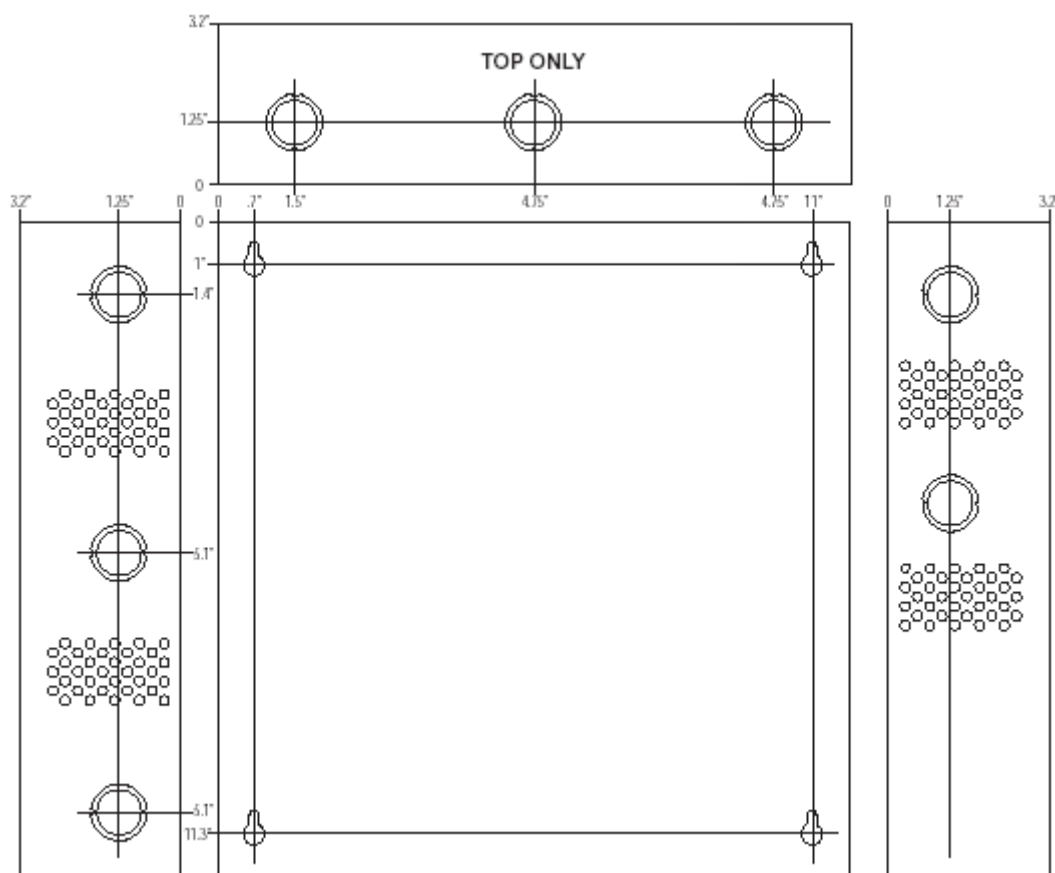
Altronix AL400UL3 Power Supply/Charger Enclosure Dimensions
